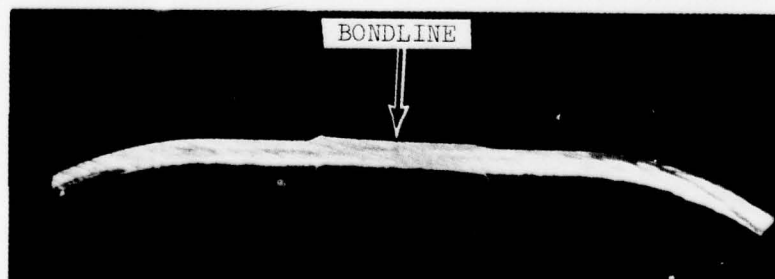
VIEW OF COUPON BEFORE BEND TEST.
